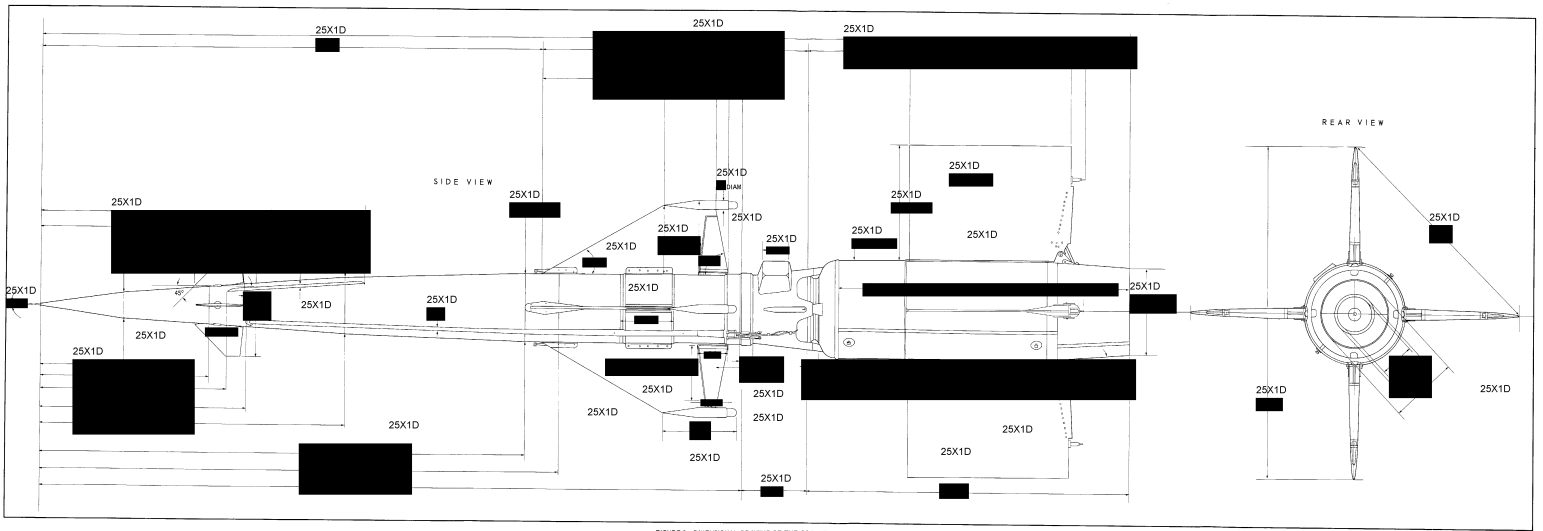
DIMENSIONAL DRAWING OF THE GDA MISSILE.
